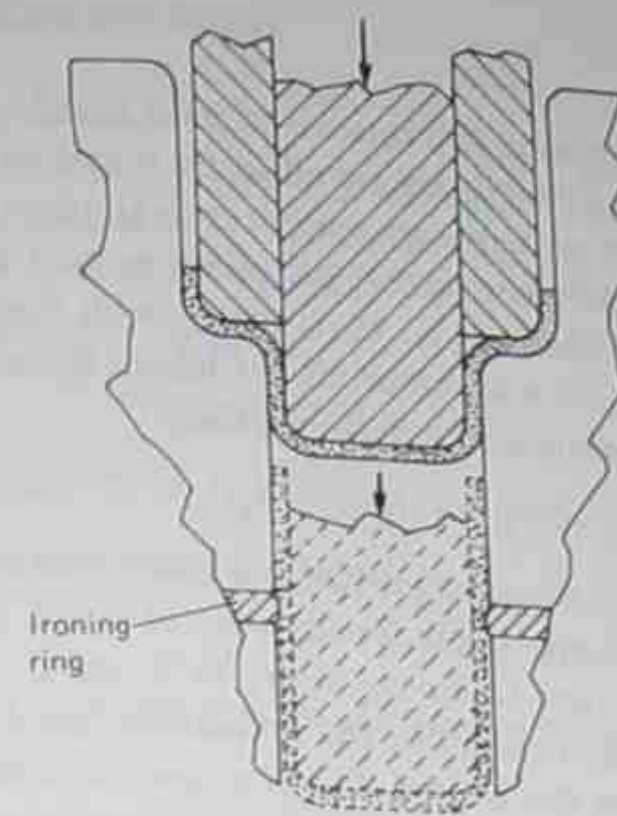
Schematic of deep drawing operation showing the final stage of ironing.
